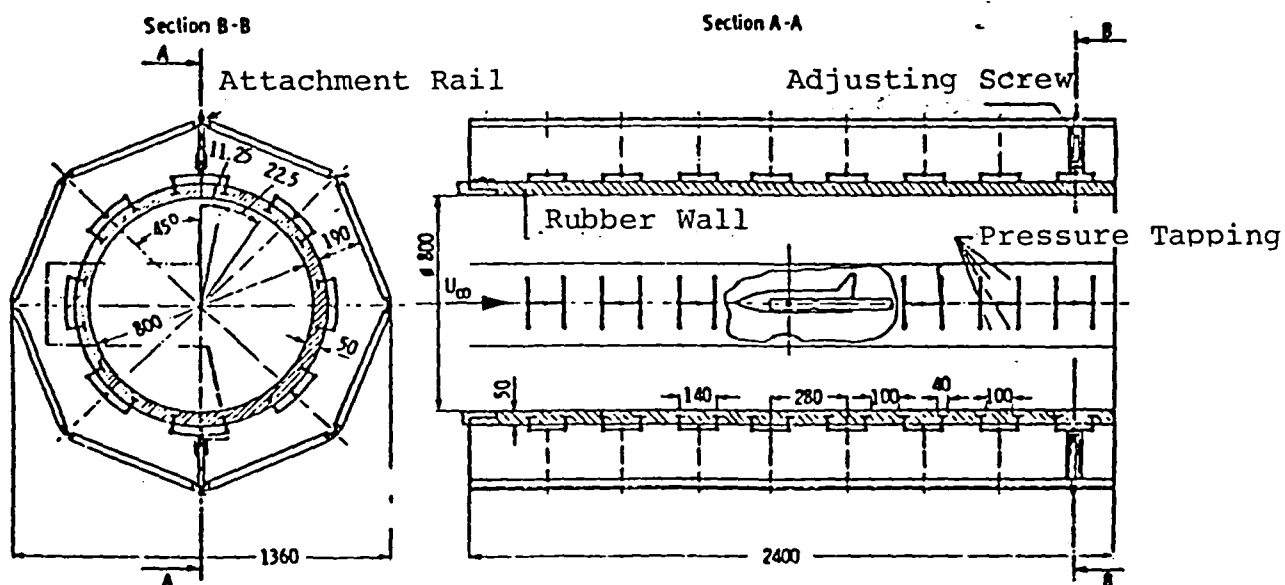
DFVLR Test Section Project with Elastic Walls
